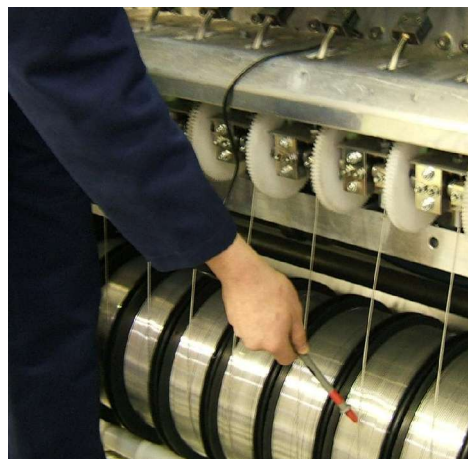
4 Photographs of Operator Checking for Potential Shorts on the Wire-feeders
